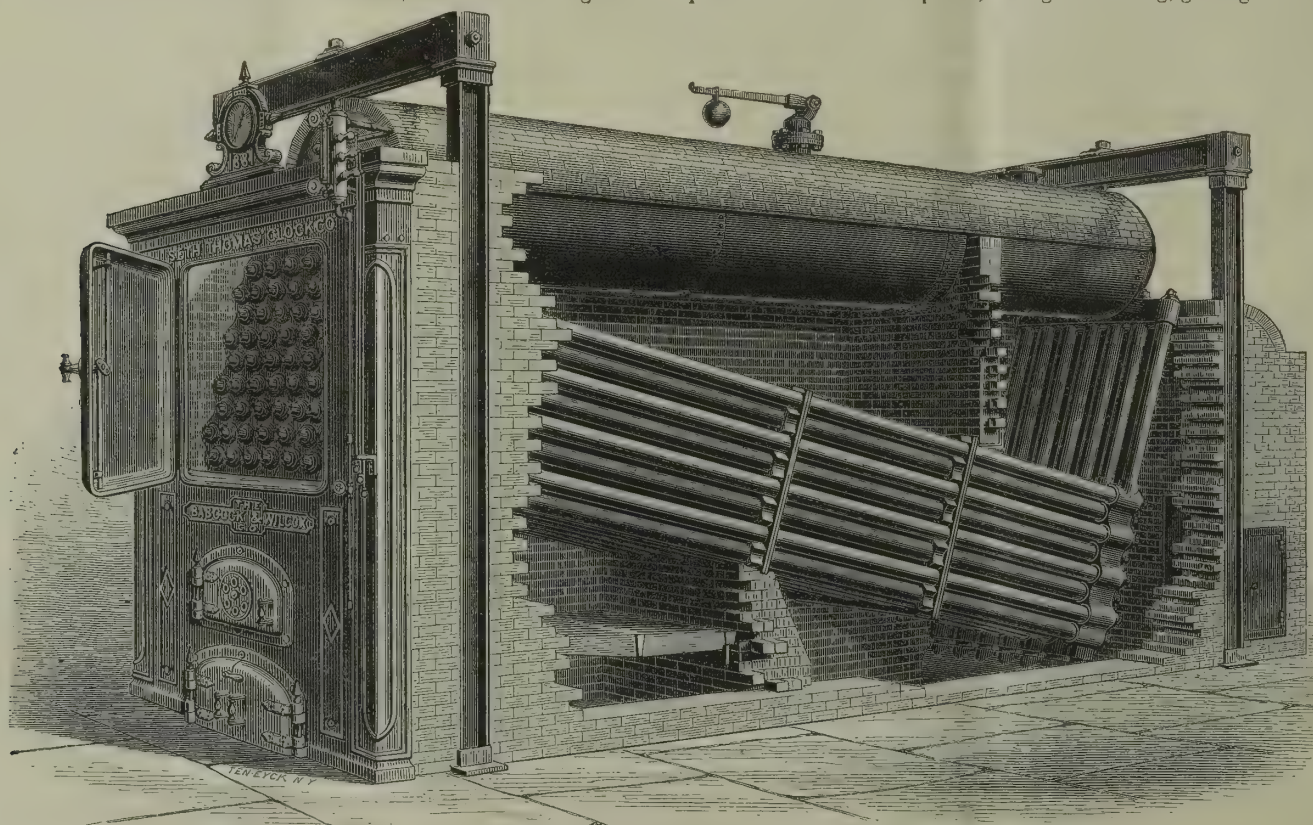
Sectional Perspective View of a Babcock & Wilcox Boiler.
